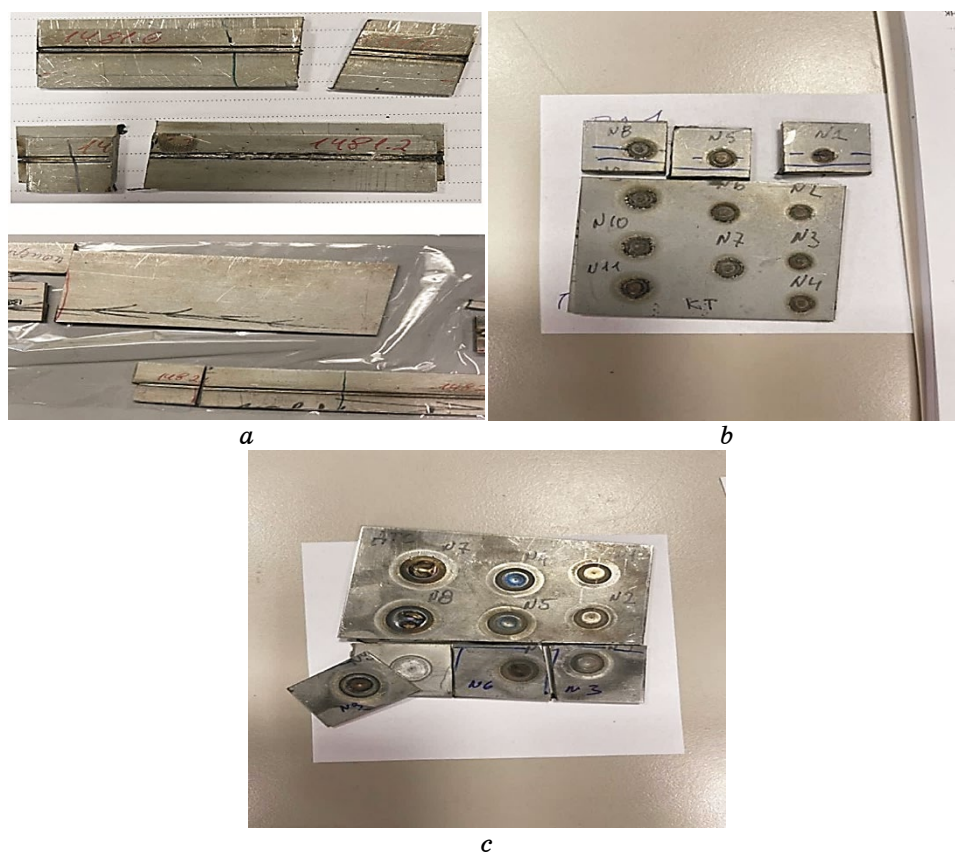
Appearance of samples after: laser welding (*a*), contact spot welding (*b*), argon-arc spot welding (*c*).
